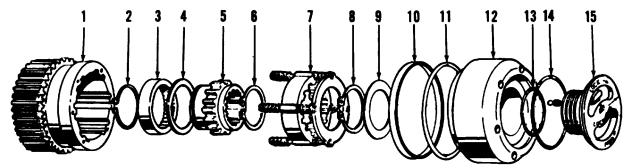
Spring-Loaded Manual Type Locking Hub with Socket Head Mounting Screws (Exploded View)
